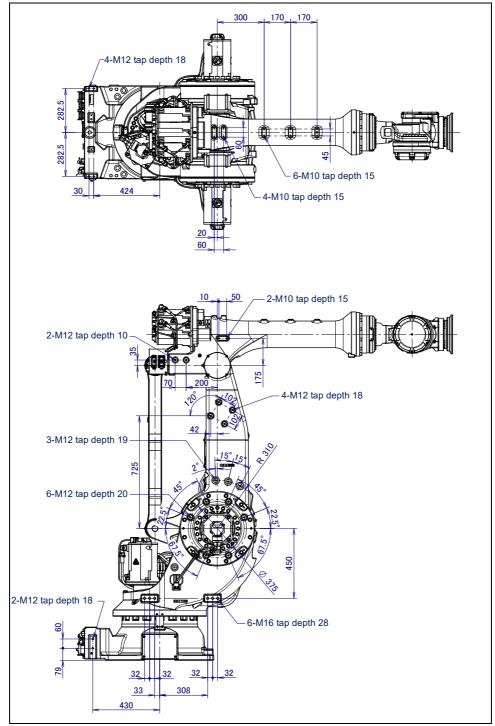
(a) Equipment mounting faces (M-900*i*B/360/360E (1/2))
